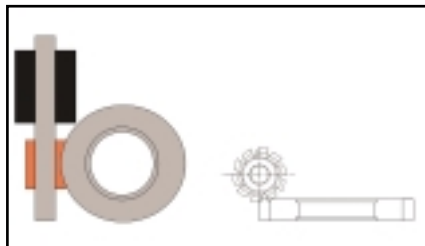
Chamfer hob shifts into cutting position. Hob slide moves to position hob above workpiece and feeds radially to depth.
